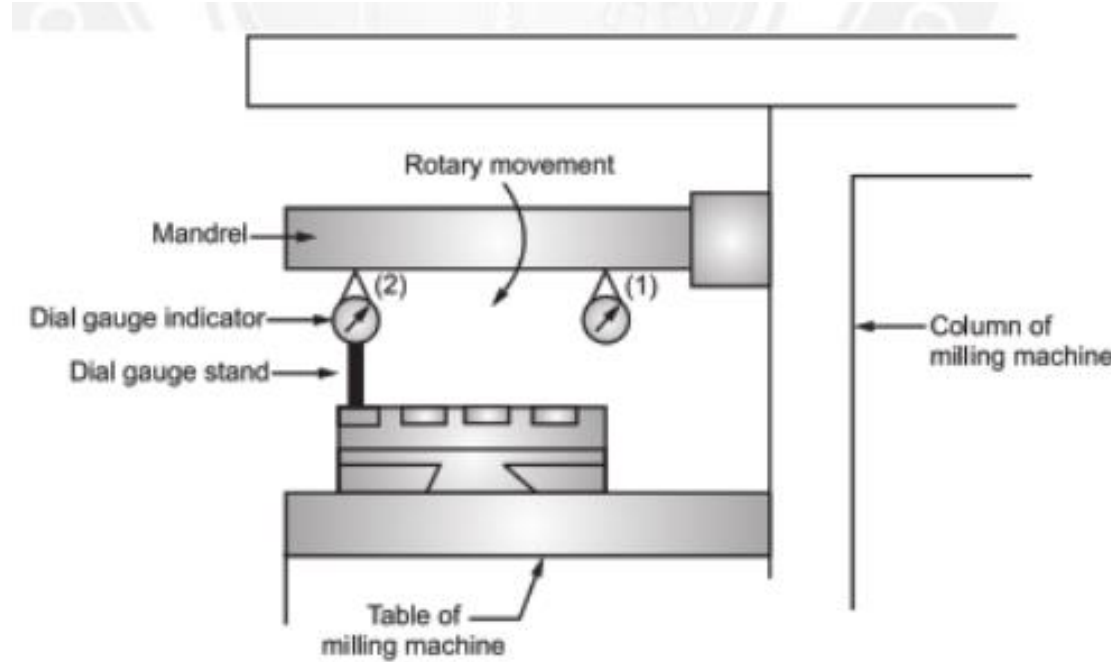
Transverse Movement Parallelism with Spindle Axis
